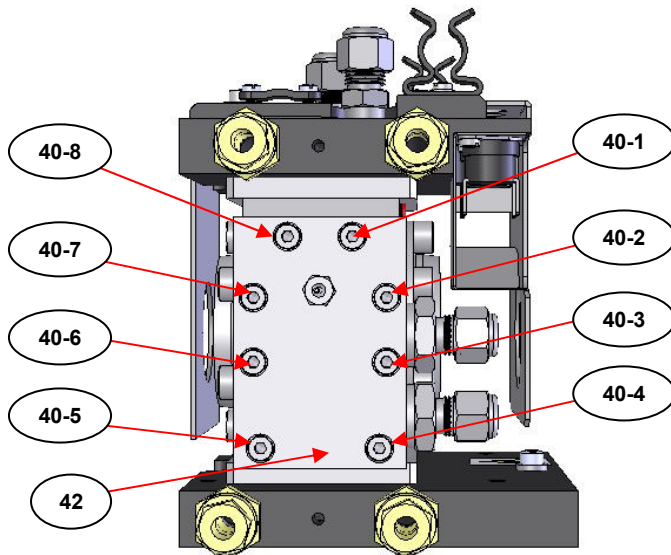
End Plate (42) Fixing Screw Tightening Sequence
